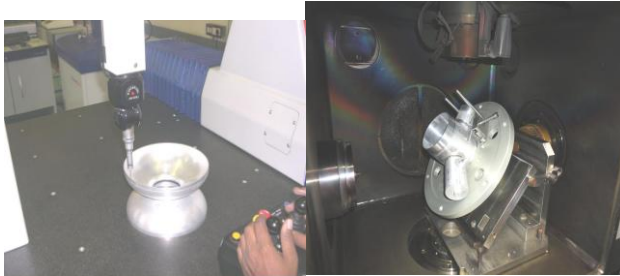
Prototype dumbbell under mechanical control and End group fabrication.
